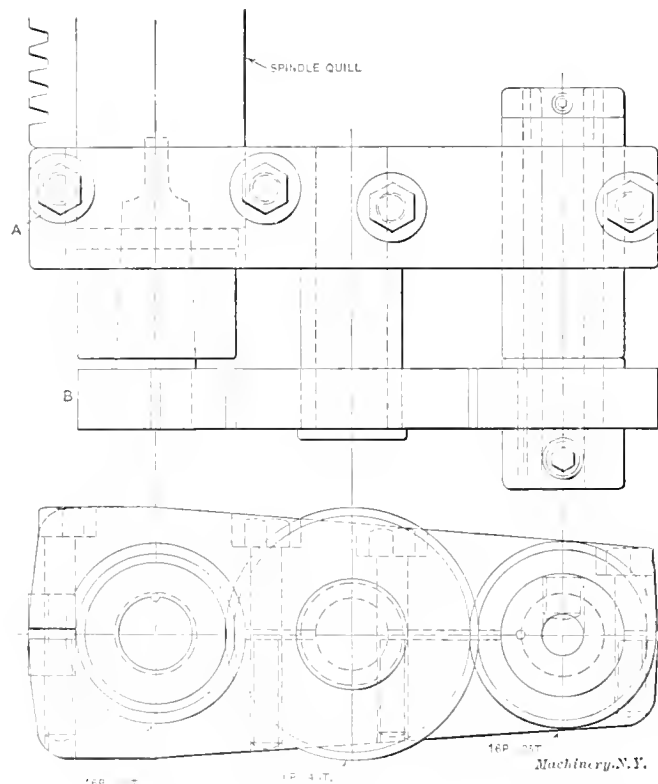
Extension Spindle and Method of attaching it to the Drill Press
